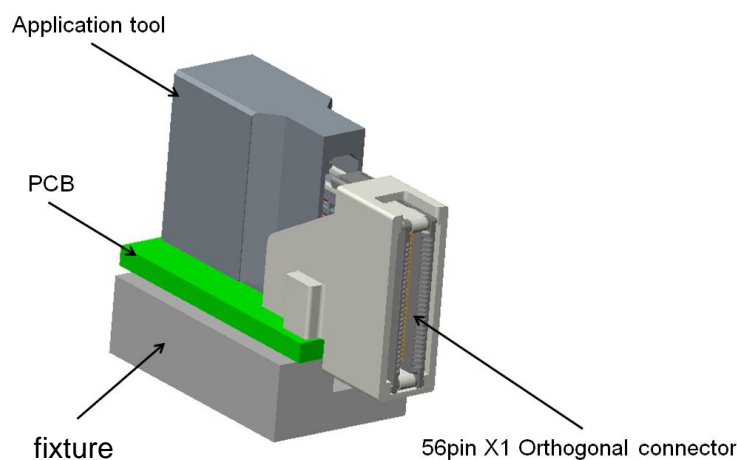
Orthogonal Cool edge MINI connectors 1X2 application tools
